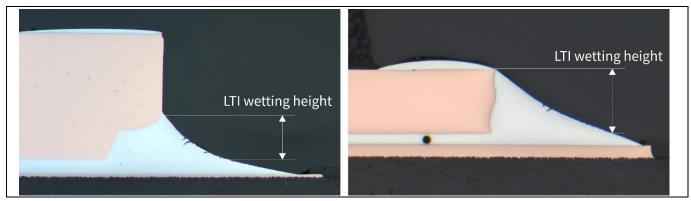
Cross section of a soldered trapezium groove LTI on the HSOF-8 (left) and of a soldered fully plated LTI on the TDSON-8 (right).
